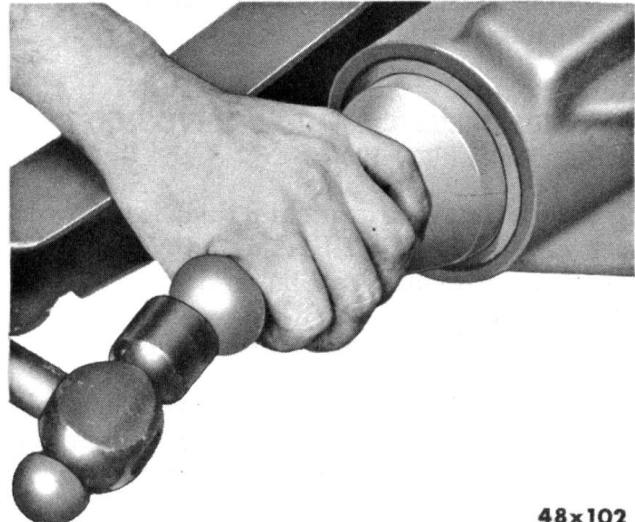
Installing Rear Axle Pinion Oil Seal (B-4-EU)
